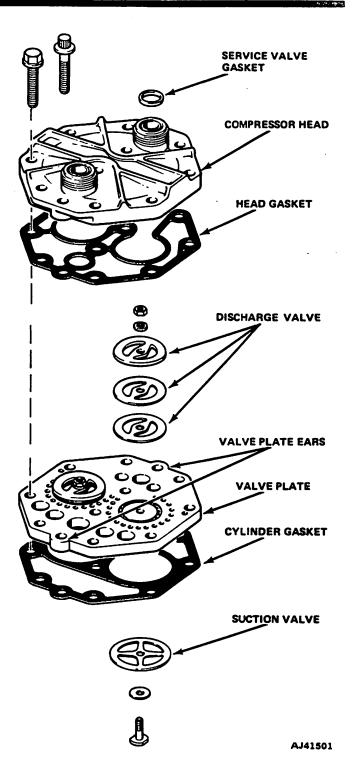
E-33 Head and Valve Plate Assembly Sequence
